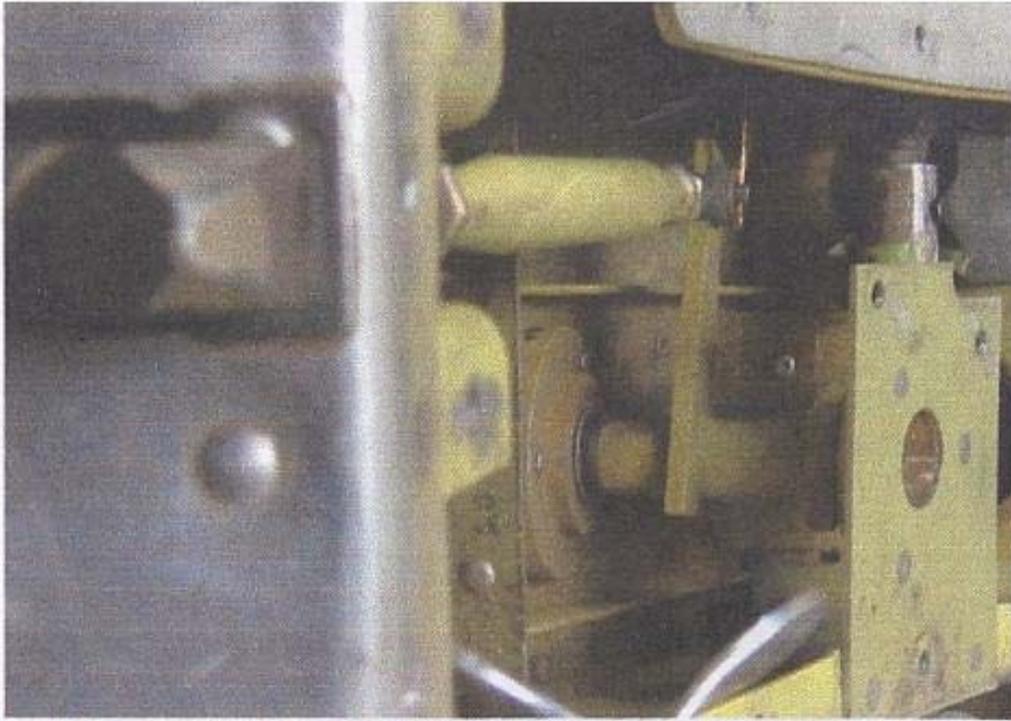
This view shows the Bellcrank assy P/N 50-430031-29. Notice twist of shaft.
